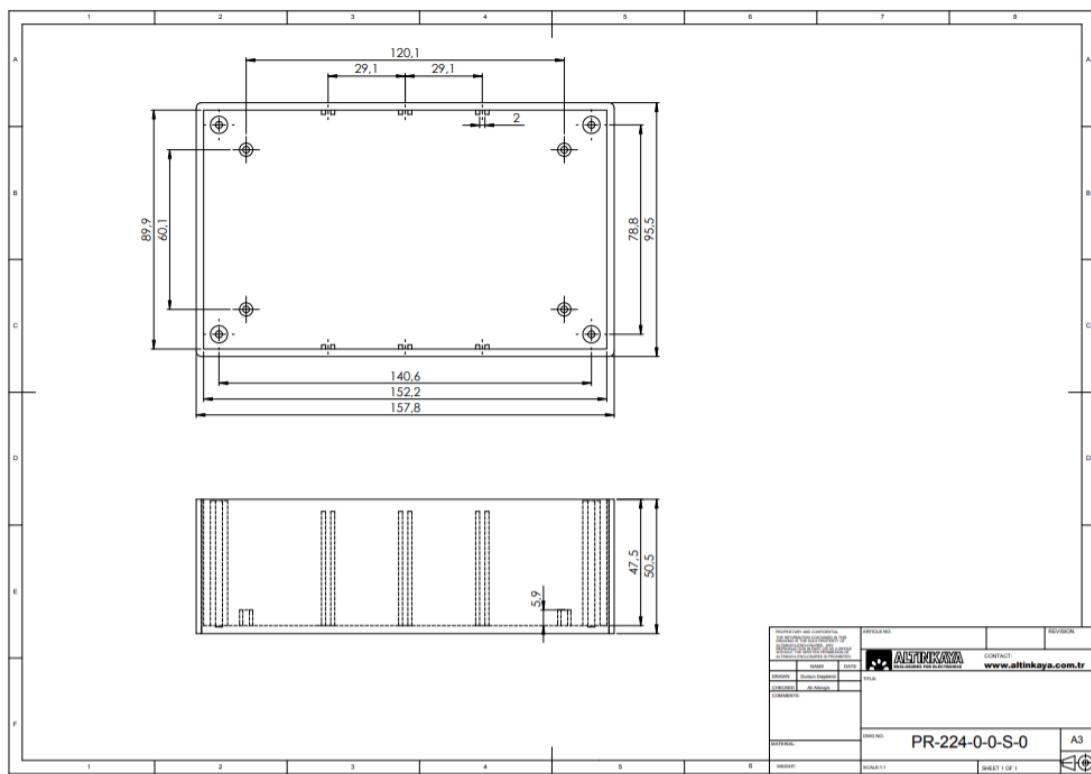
Technical drawing of the Temperature Measurement Subsystem enclosure
